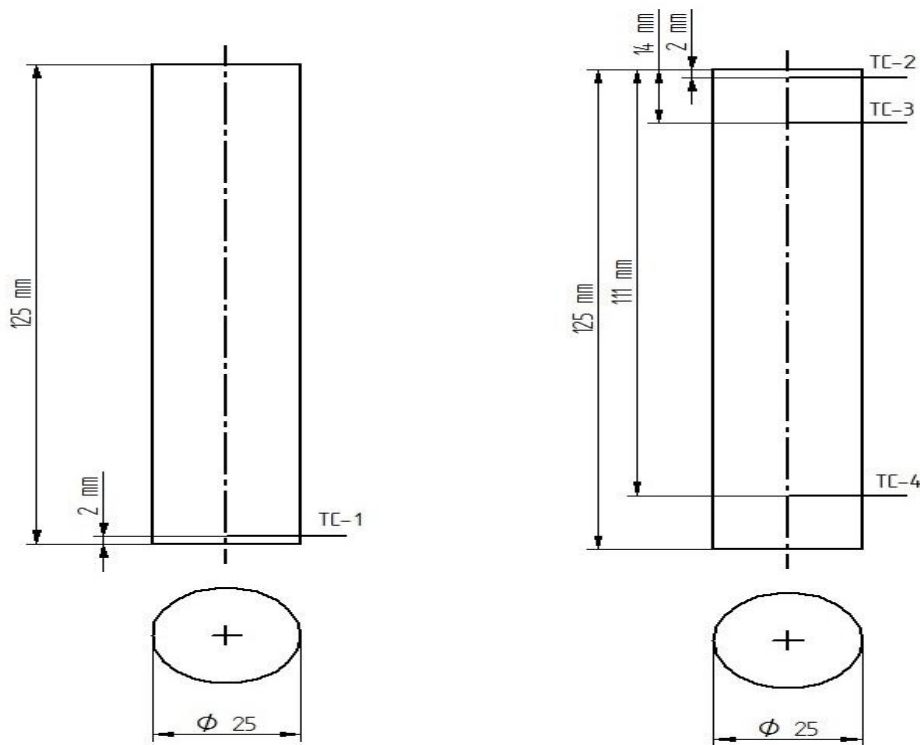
Dimensions of specimens with L/D of 5. TC-1, TC-2, TC-3 and TC-4 represent thermocouple locations a) dimensions of source b) dimensions of sink
